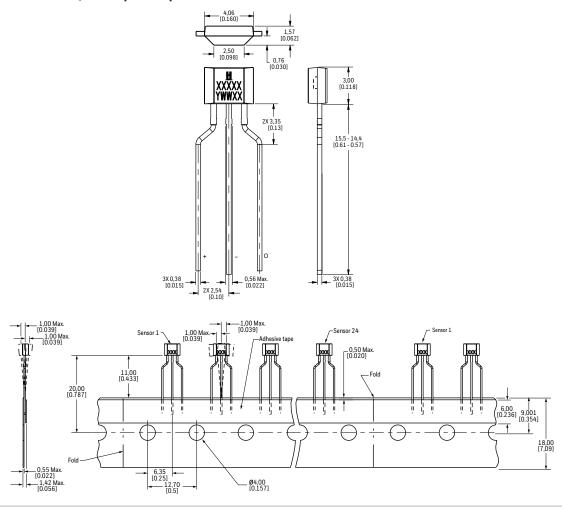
SS400 Series Flat TO-92-Style Mounting and Dimensional Drawings (For reference only: mm/[in].)
